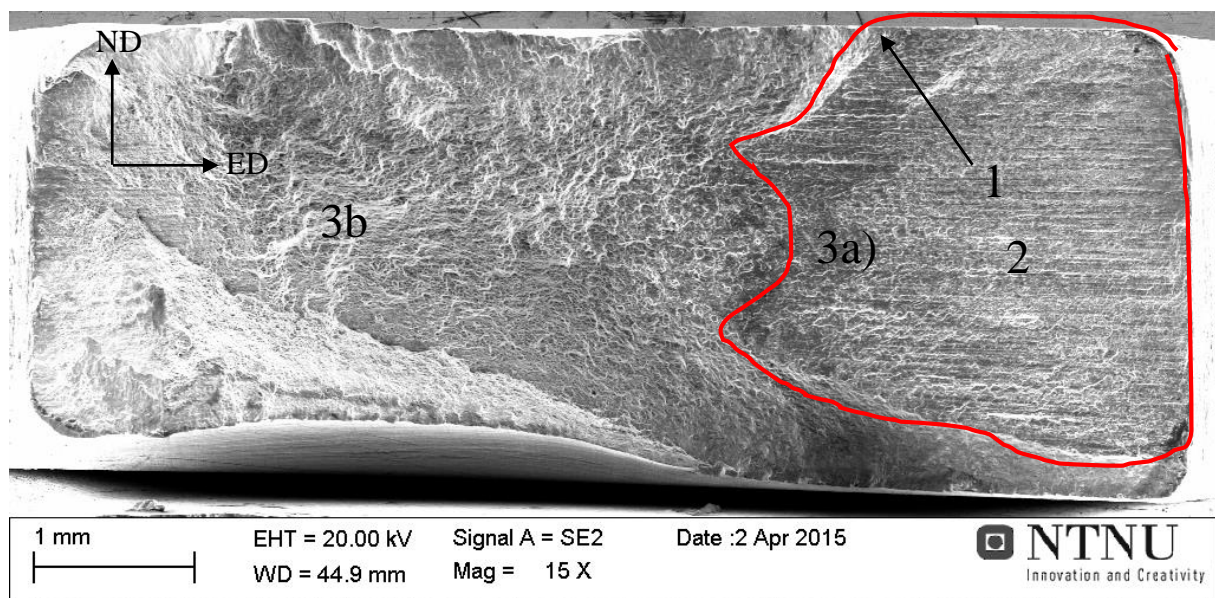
An overview of the fractured surface of AA6082 T1 with the longest fatigue life, 15X magnification. The fatigue fractured area is enclosed by the red line.
